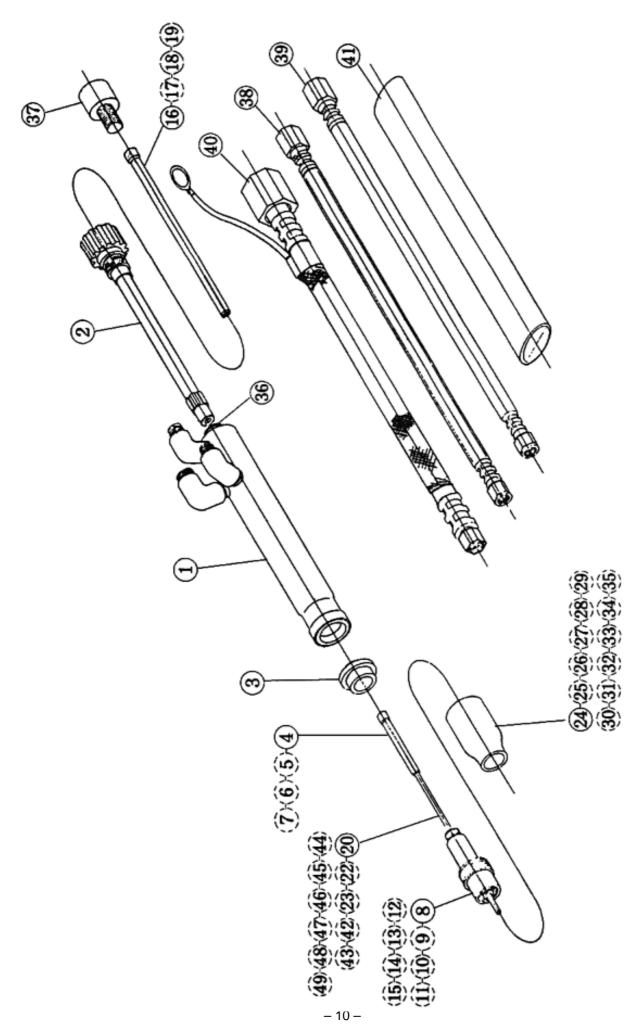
MWP-18 TIG Welding Torch Parts Layout
